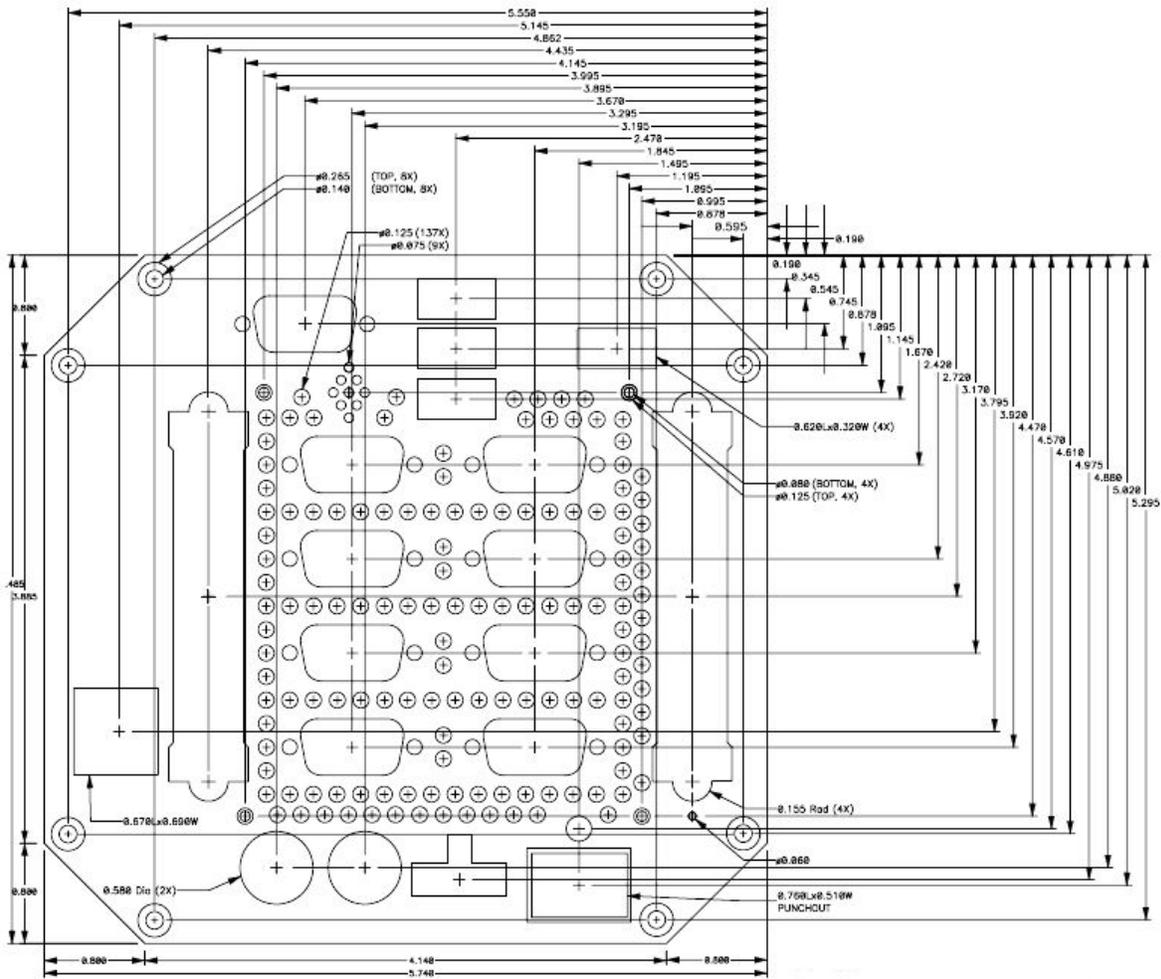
Top/Front End Cap Dimensions (DSC #PBEC-11-K)
